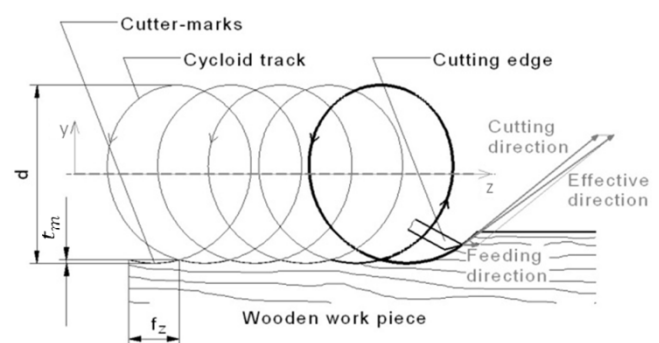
Cutting edge trajectory and development of cutter-marks of peripheral milling (Climb cutting)
